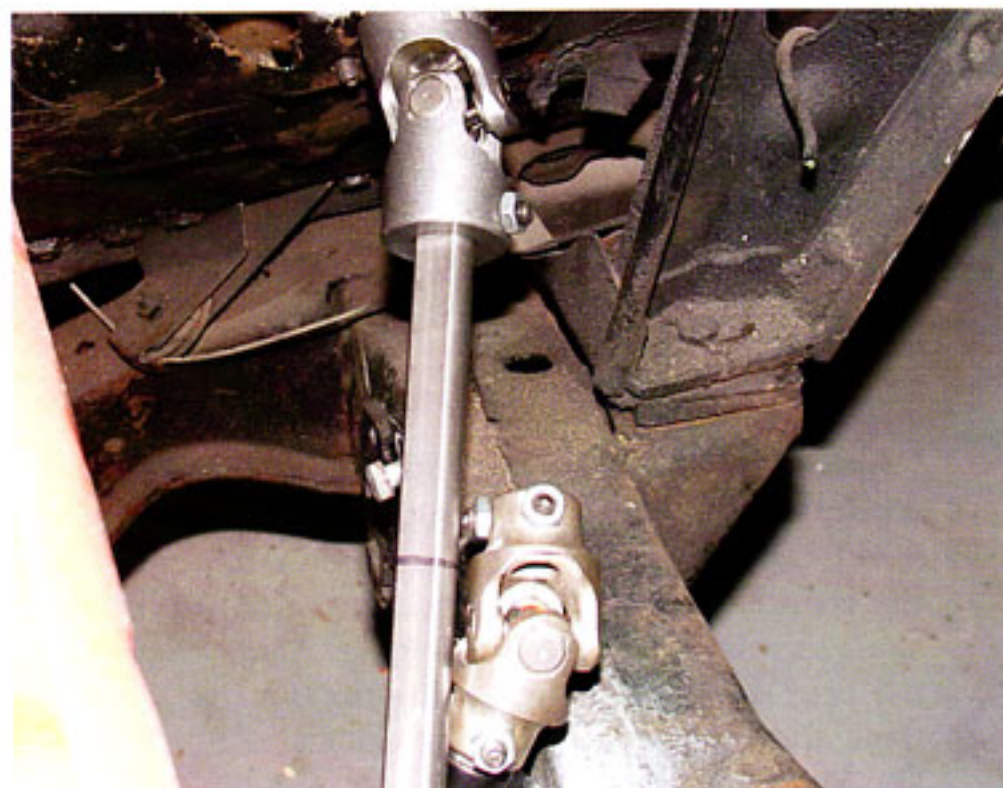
Next install the remainder of the 3/4" DD shaft into the upper U-joint on the bottom of the steering column and lock it into place with the set screws. Place the shaft next to the center U-joint and mark the shaft where it needs to be cut.
